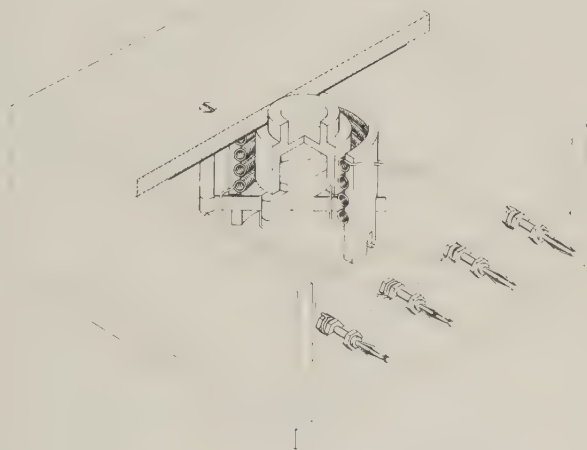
Cutaway drawing showing construction details of plug-in heater units.
